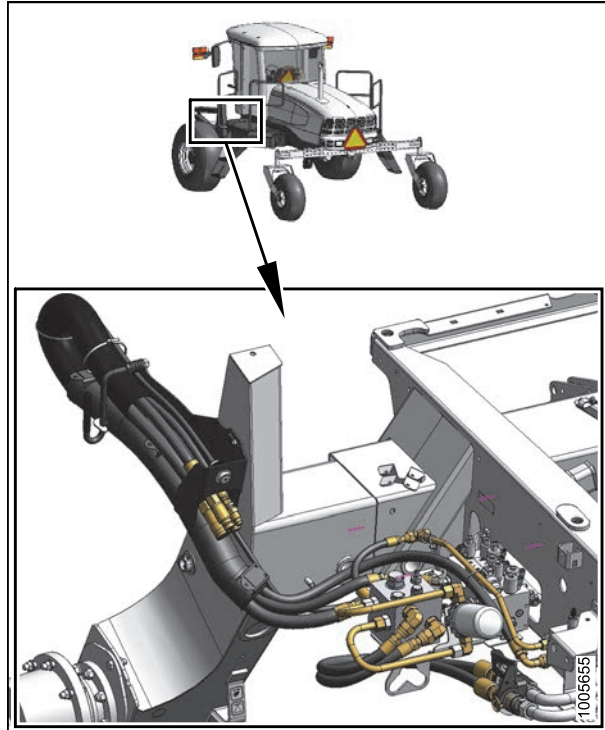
Auger Drive Basic Kit and Completion Kit Installed
